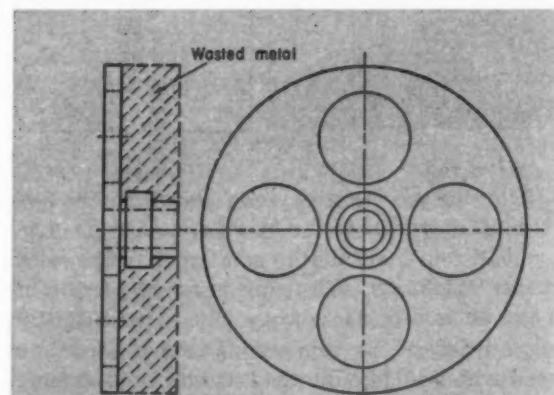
Above—Cluster gear blank of stainless steel. Shaded area represents wasted metal
